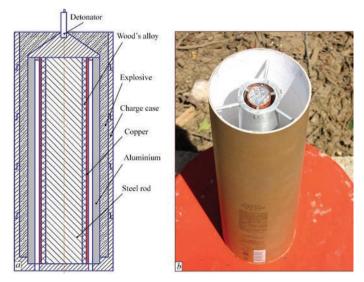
Scheme of assembly for explosion welding in order to produce a bimetal pipe billet (*a*) and billet for explosion welding with a steel rod, covered by Wood's alloy inside the copper tube (*b*)
